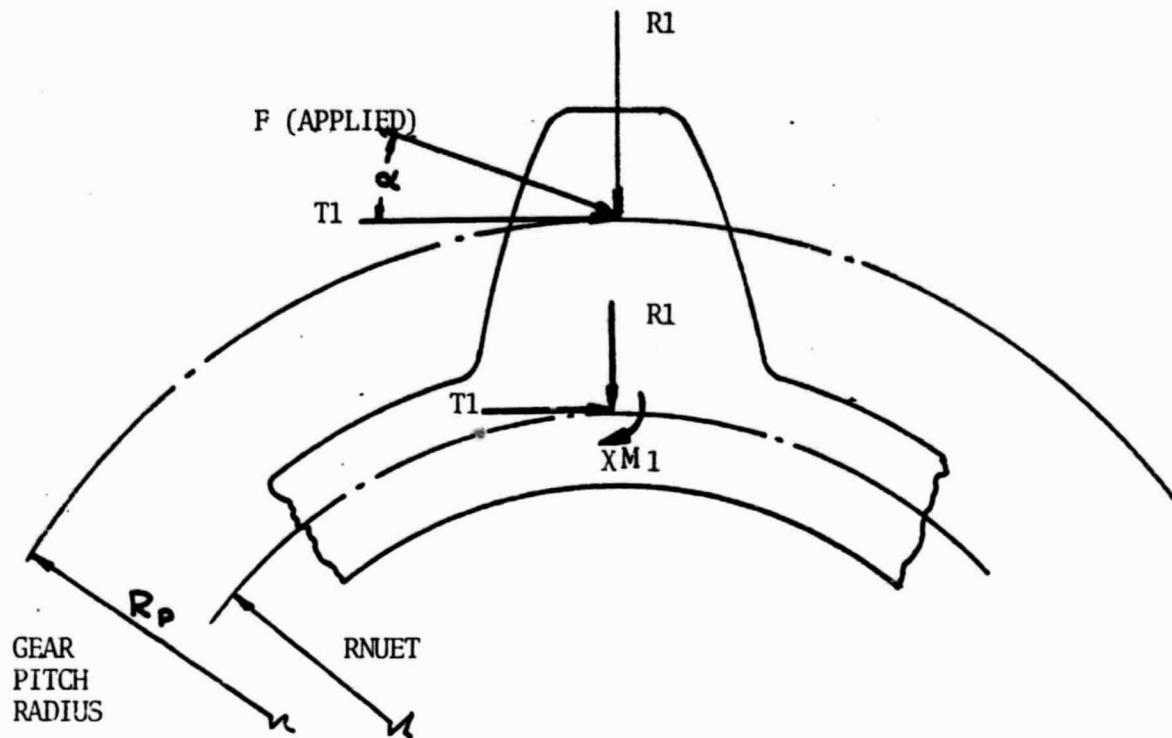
IDEALIZED GEAR TOOTH LOADS.
